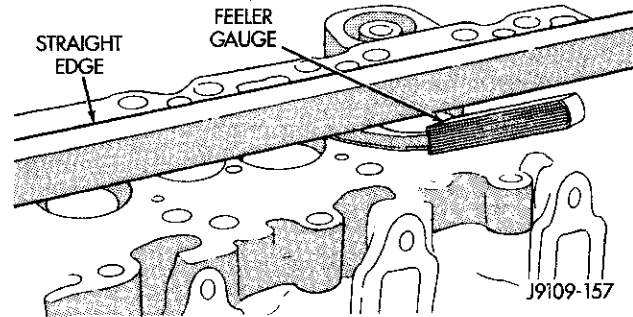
Cylinder Head Combustion Deck Face Measurement
